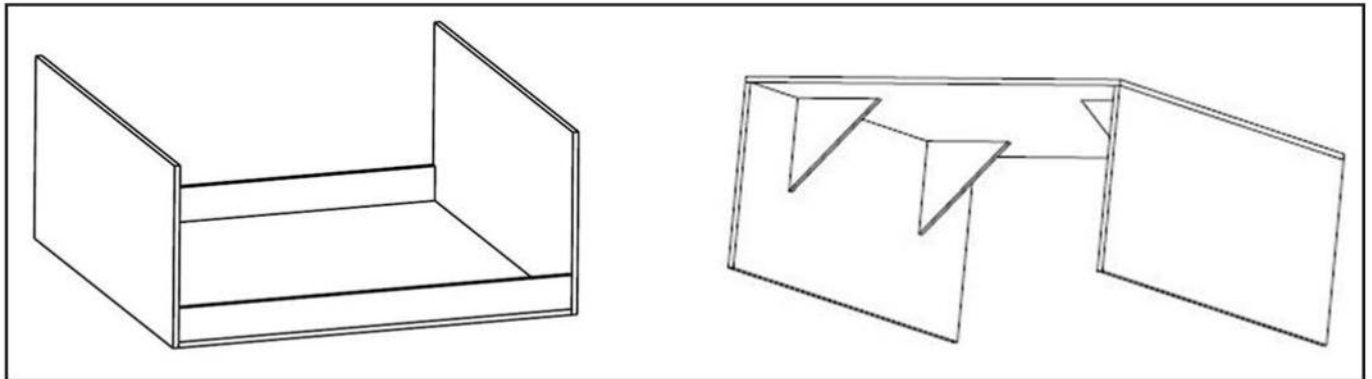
Gussets, also made from PC board, provide added structural strength to the assembly. Be sure to place them where they won't interfere with any components inside the case.
